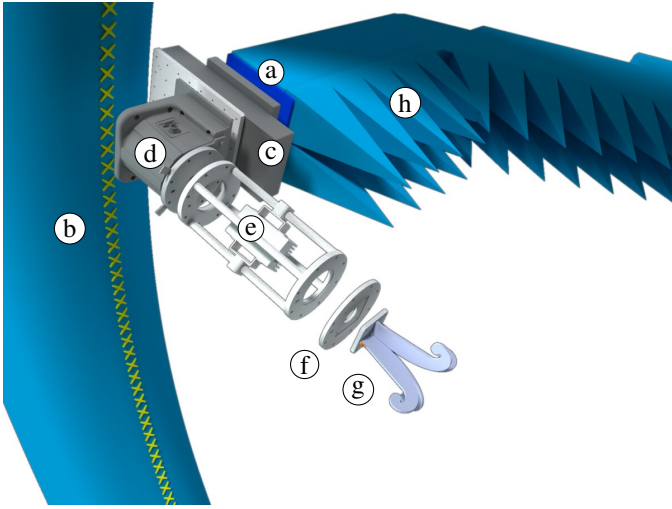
Partially exploded assembly drawing of the static elevation positioner. Tip of the flattened quarter circle boom (a) in front of the left side of the multi-probe arch (b). Radial positioner (c) and polarization positioner (d) with universal probe flange. Exemplary probe (e) (microwave amplifier and polarization switch) with same flange as (d) on right-hand side. Exchangeable adapter disc (f) between universal probe flange and antenna (g). Microwave absorbers (h) are magnetically mounted to facilitate exchanging absorbers according to frequency range.
